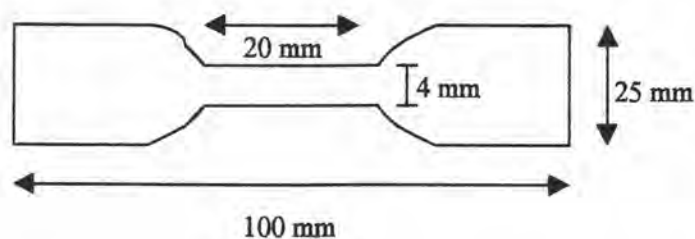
Schematic representation and dimension of dumbbell shape specimen⁽²²⁾
